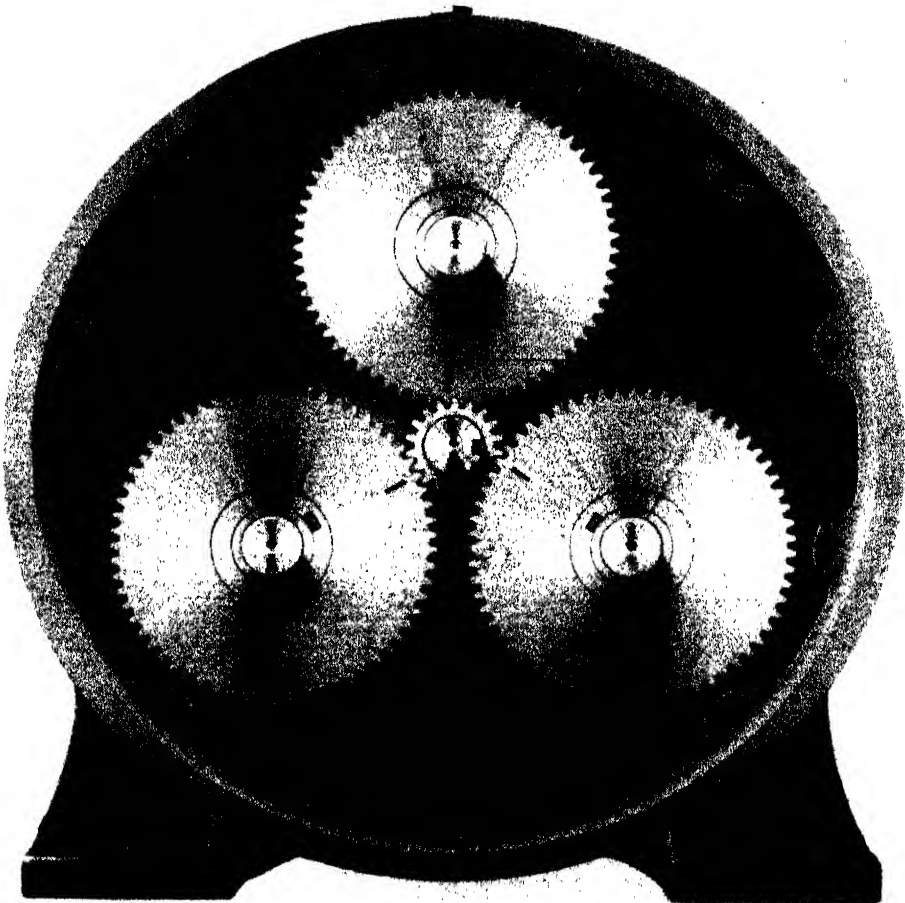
B. SPUR GEAR REDUCER. (Courtesy, W. A. Jones Foundry and Machine Co.)
